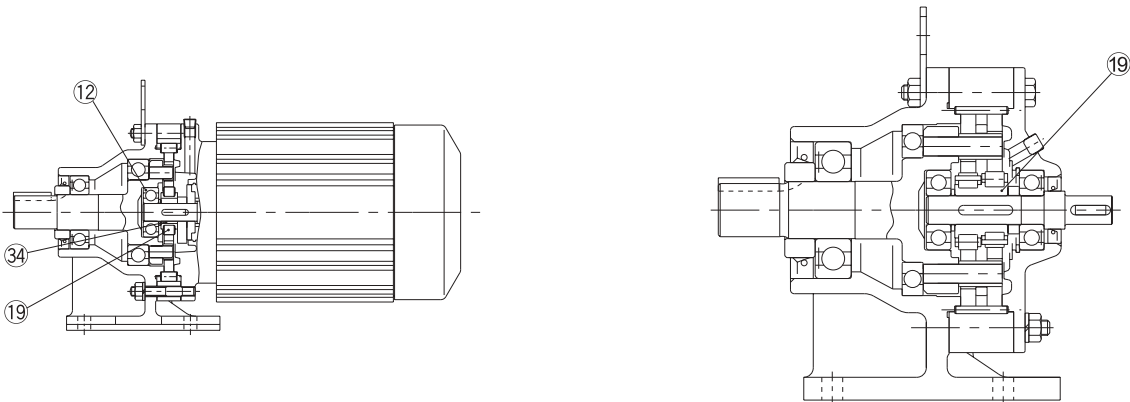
Type CNHM (Horizontal Gearmotor)
